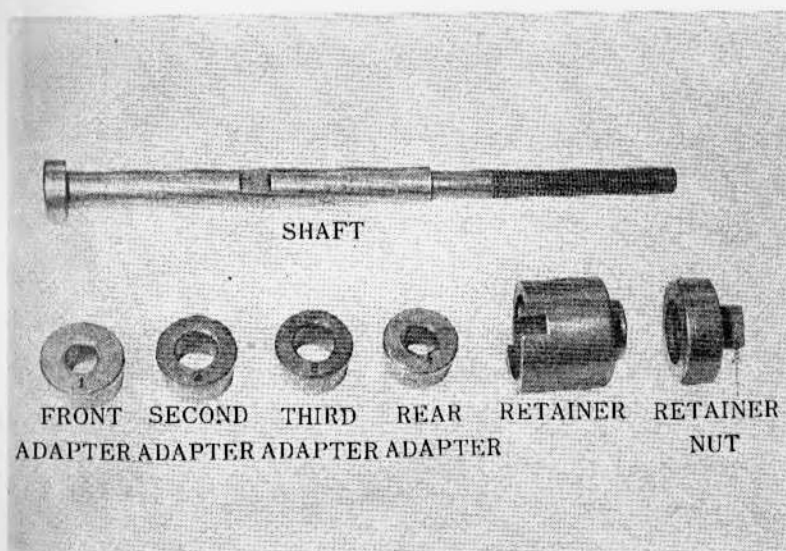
Camshaft Bearing Replacer (BX SST-1025)
